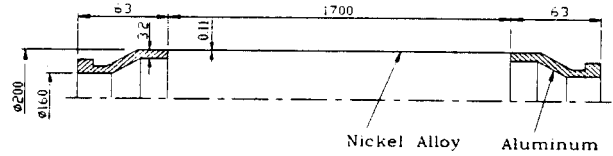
A half sectional geometry and dimensions of the rotary screen
